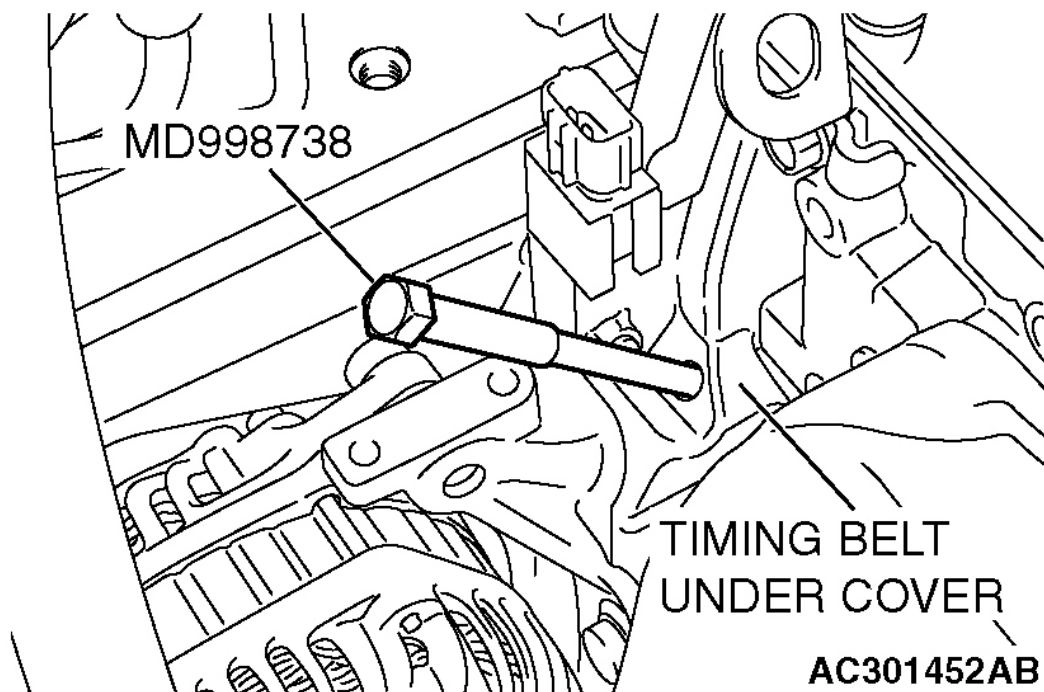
Installing Rubber Plug To Timing Belt Under Cover
